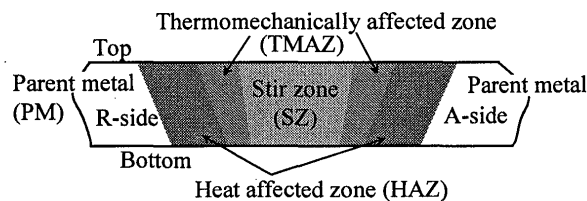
Schematic illustration of weld zone in FSW joint.
